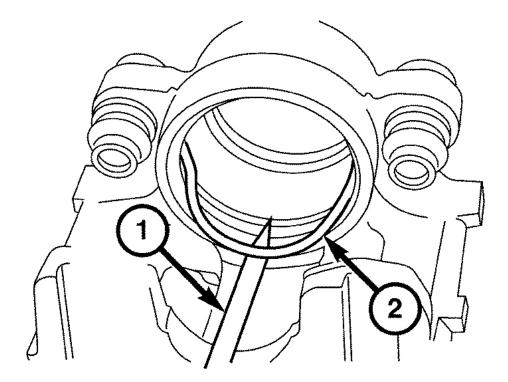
Removing Caliper Piston Dust Boot - Typical Courtesy of CHRYSLER LLC
